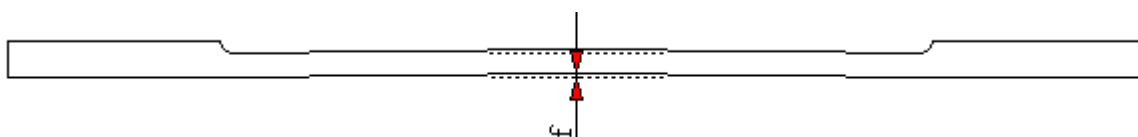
Measurement of the deflection  $f$  [mm] of the milled strip
